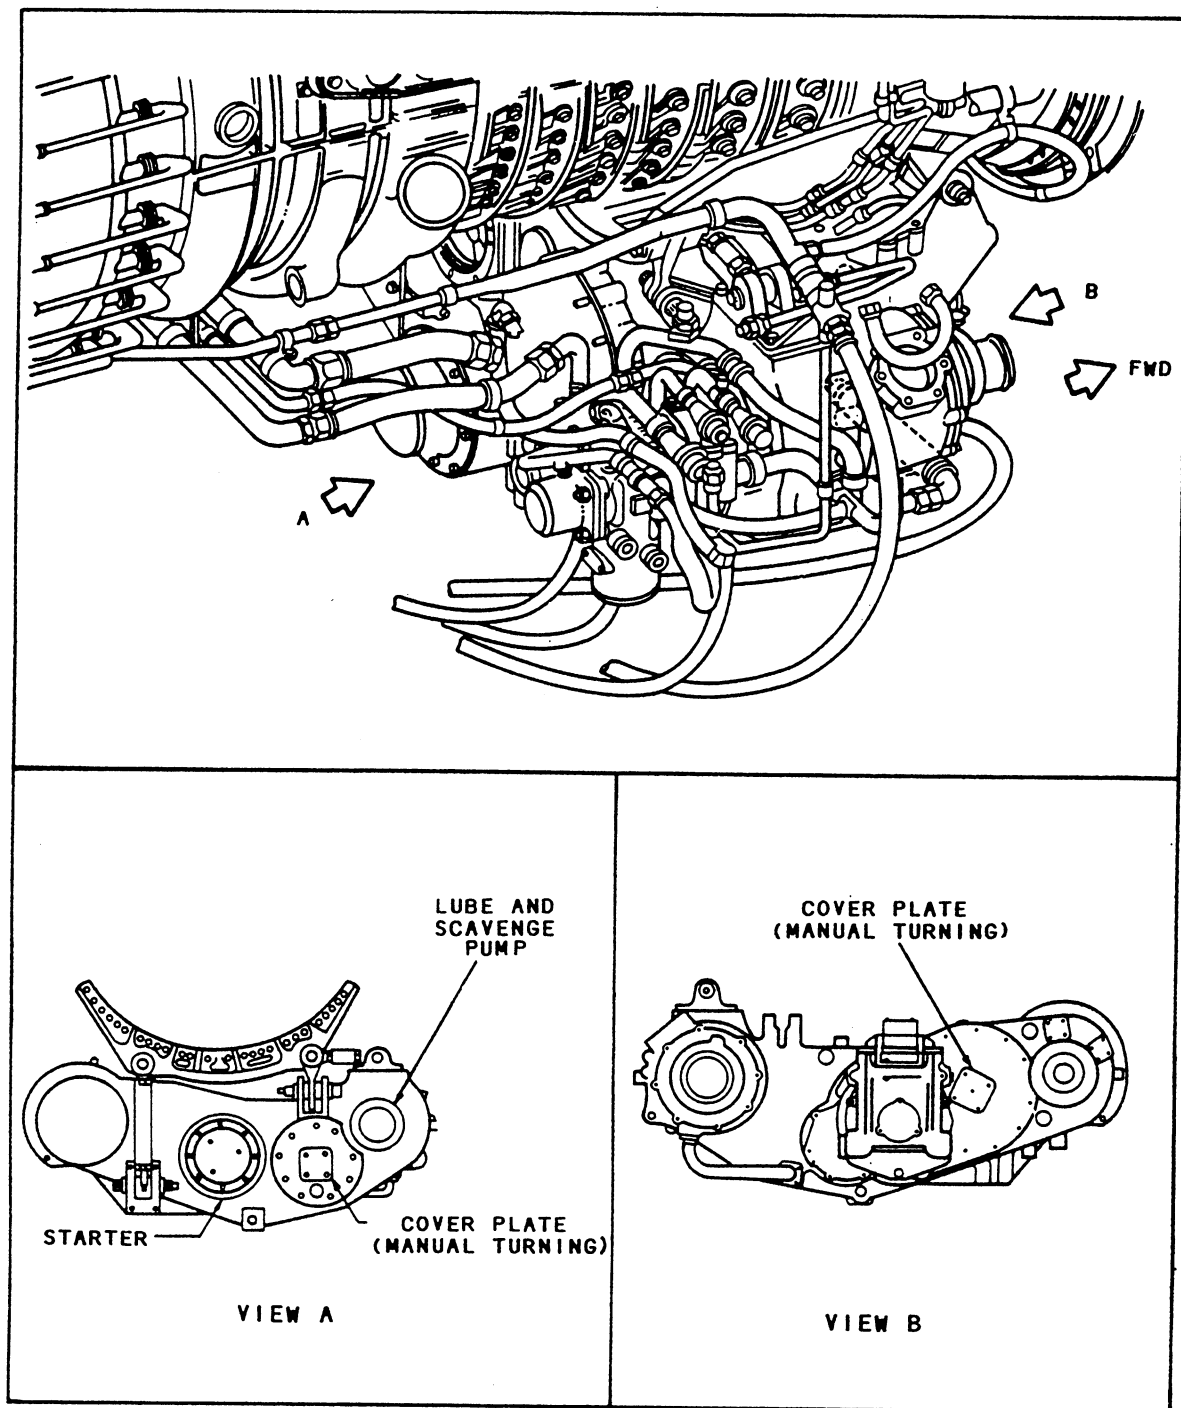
Engine turning locations for borescope inspections.
